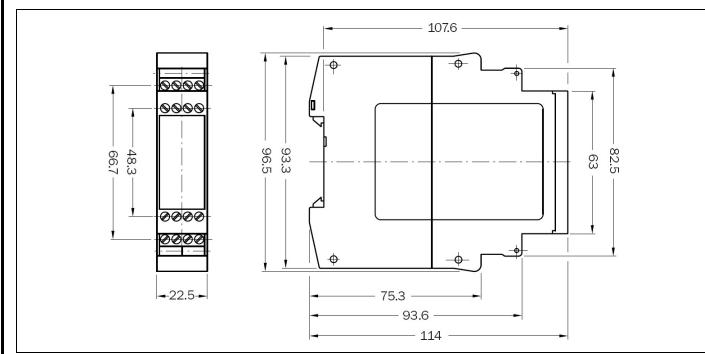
Dimensional drawing UE45-3S1 (mm)
